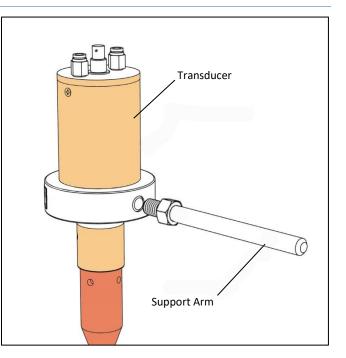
3. ACT-22-LSP Support Arm Attachment.
